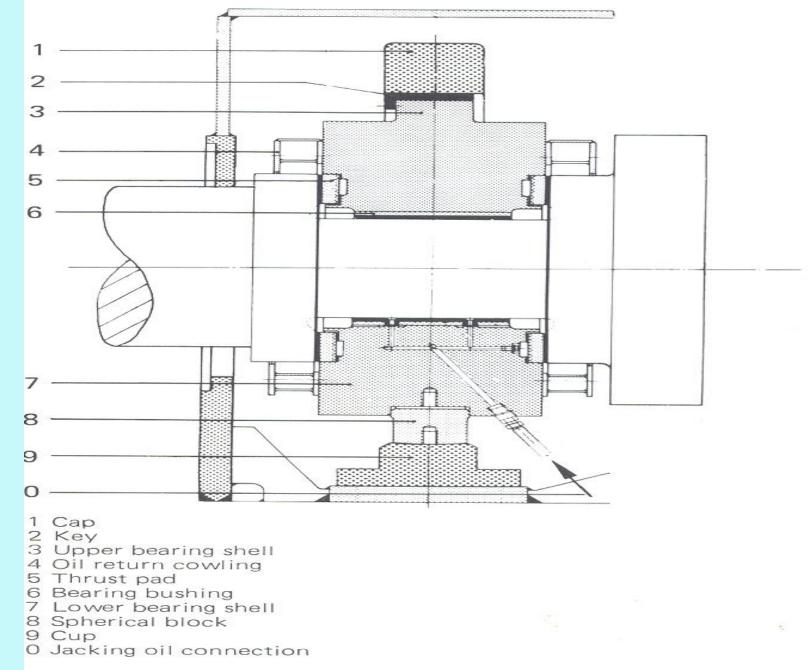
Lower Bearing Shell in Bearing Pedestal
